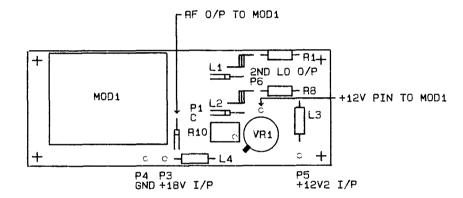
Oscillator Module - 2nd Local Oscillator VCO Board - Side A layout
